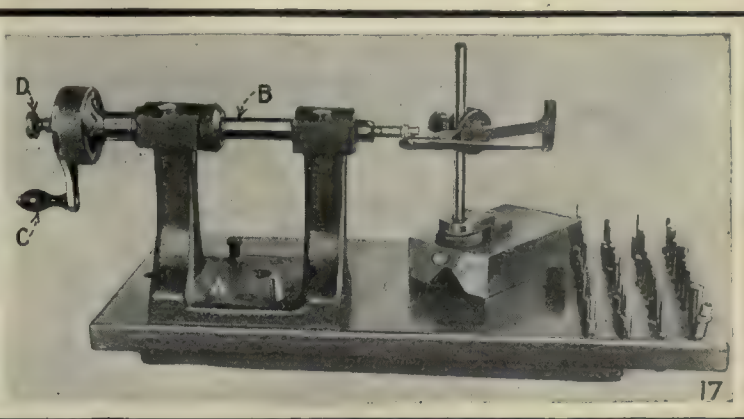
TEST GAGE FOR CONCENTRIC PARTS
